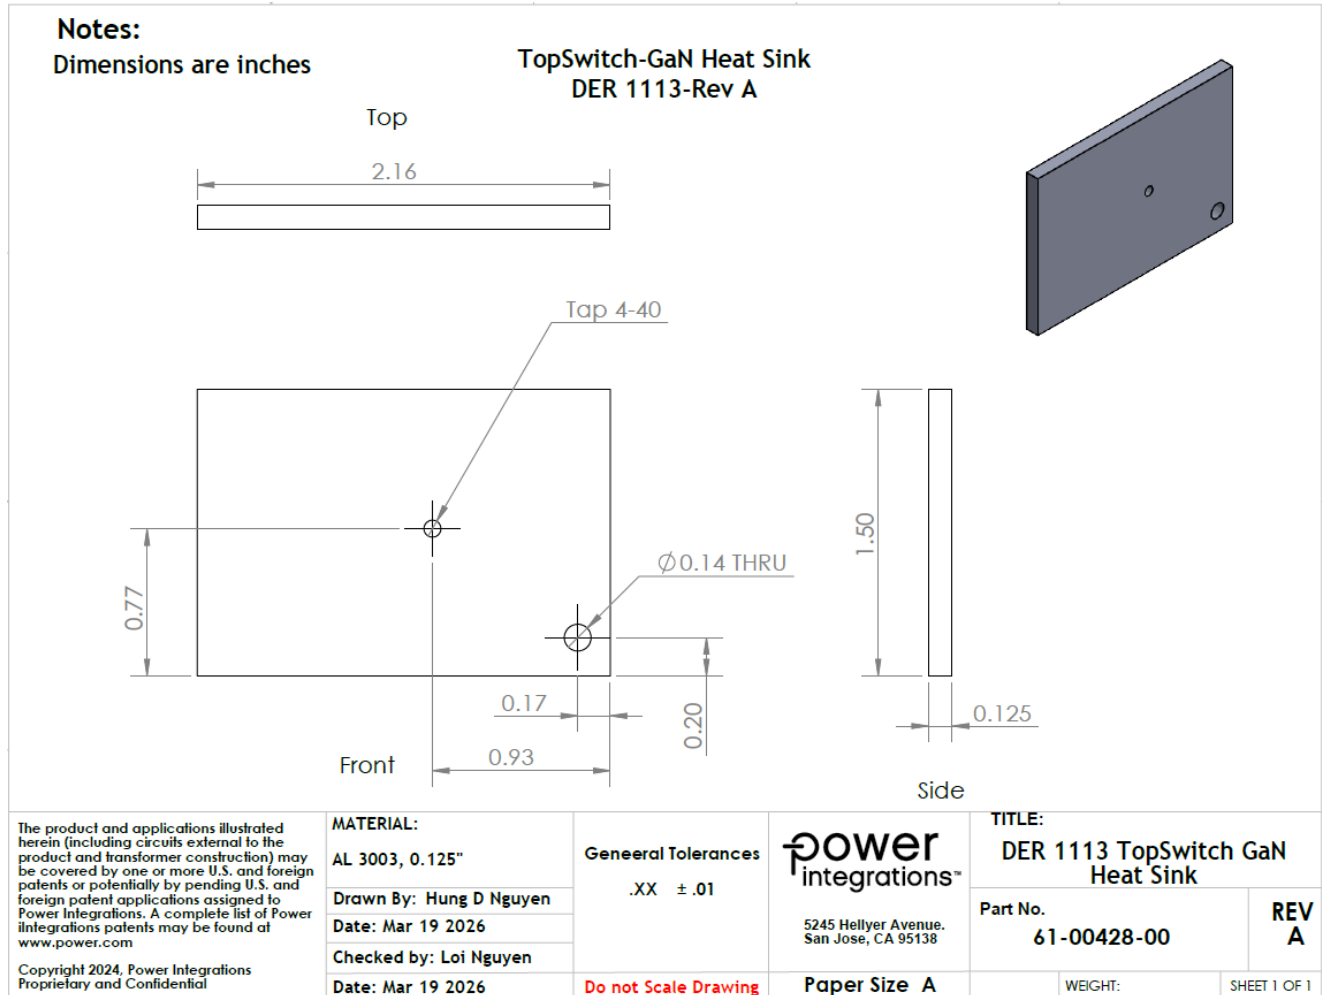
TOPSwitchGaN IC Heatsink Assembly and BOM.
